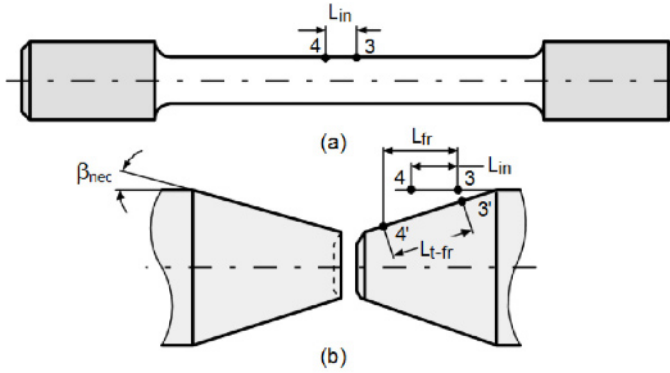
(a) Tensile specimen, and (b) failed parts after the tensile test
